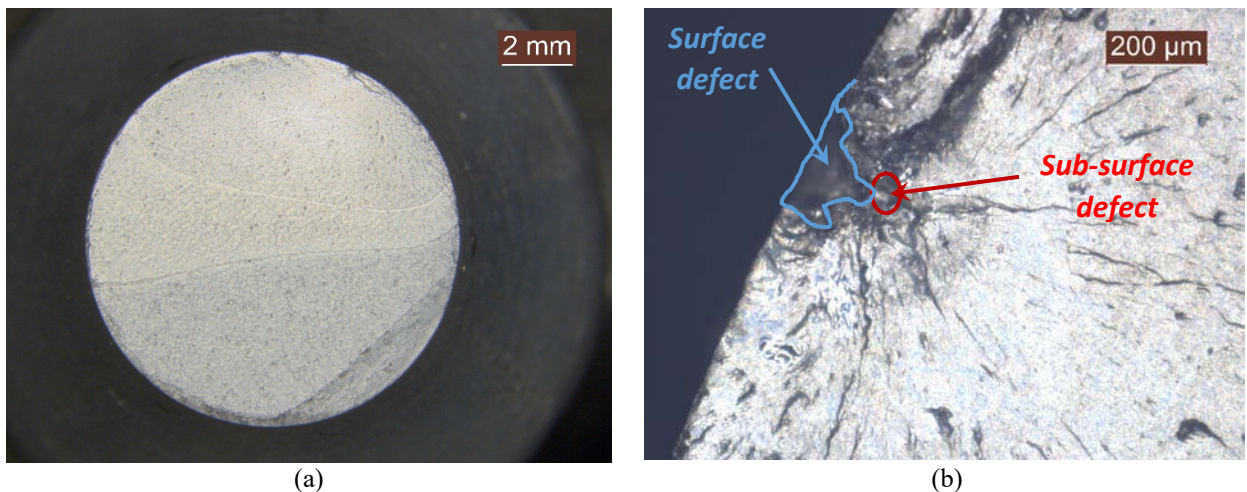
Optical images of the fracture surface: (a) global view; (b) magnification of the crack origin.
